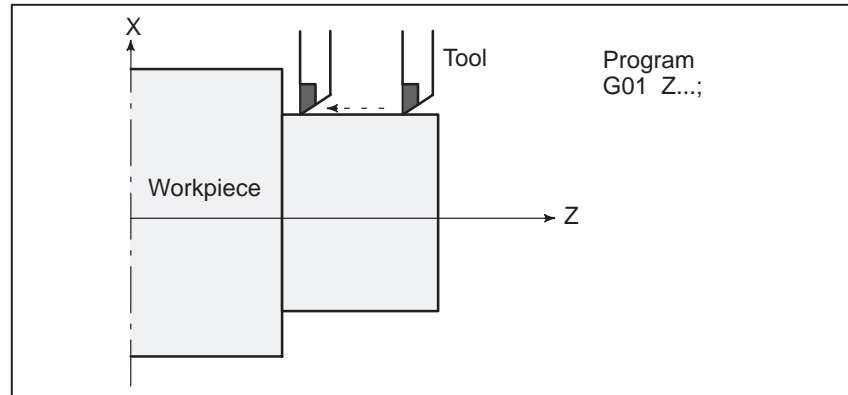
(a) Tool movement along the straight line which is parallel to Z-axis
